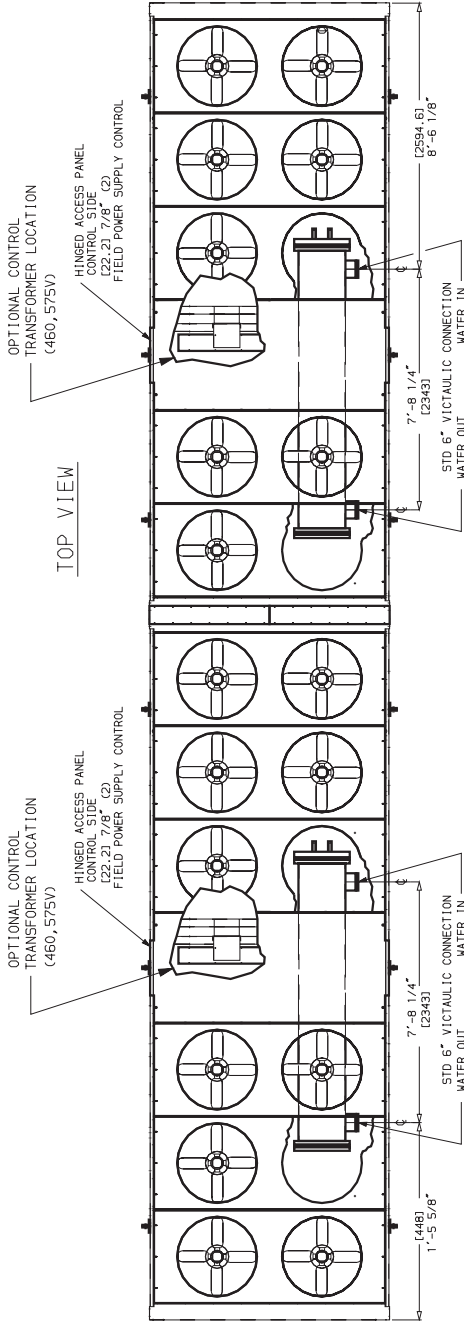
Dimensions, Unit Size 360 (50 Hz) (A/B Modules Shown Connected with Accessory Trim Kit)
